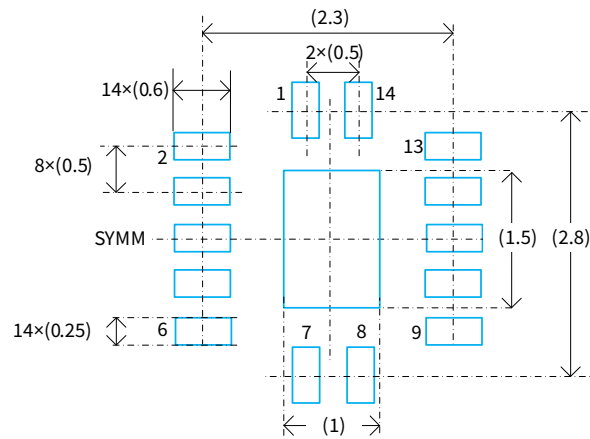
WQFN14 package shape and dimension in millimeters for NCAB0104-Q1QDDR
